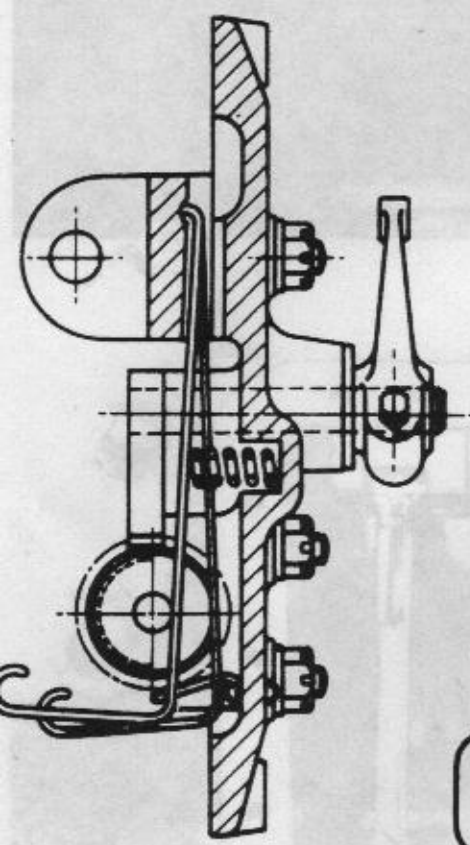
Side view of gearbox with gear selector cover removed, showing gauge in position and 4th gear engaged
